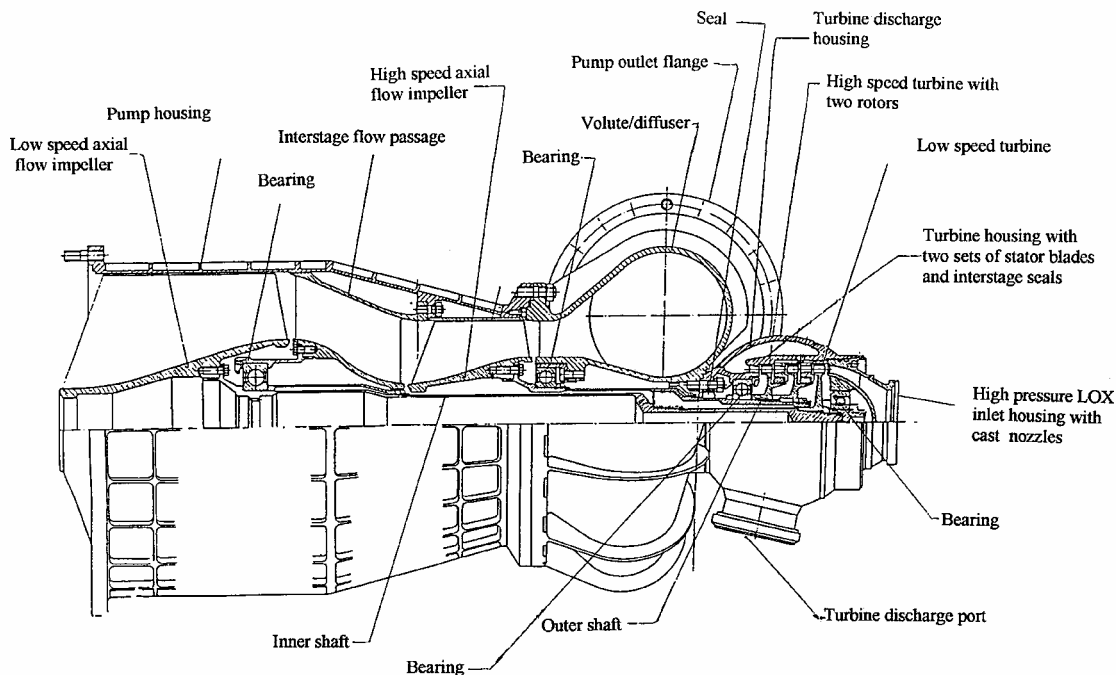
Oxygen booster pump of the RD-0120 with two shafts, one inside the other, driving two pump impellers at different speeds.³⁸
